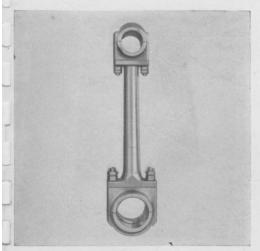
Double-marine type connecting rod used on largest bore engines.
